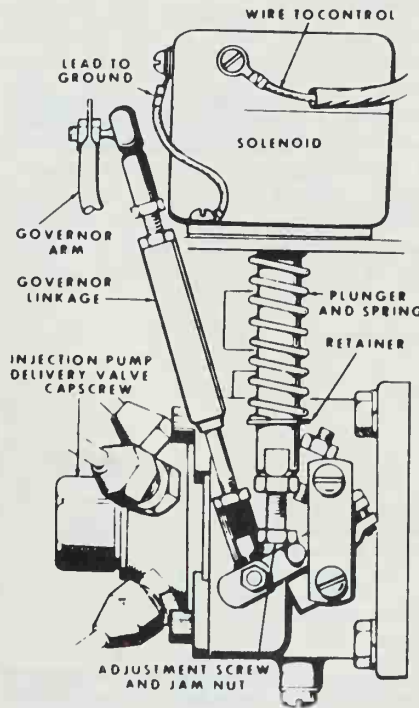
Installed view of fuel solenoid. Refer to text.
